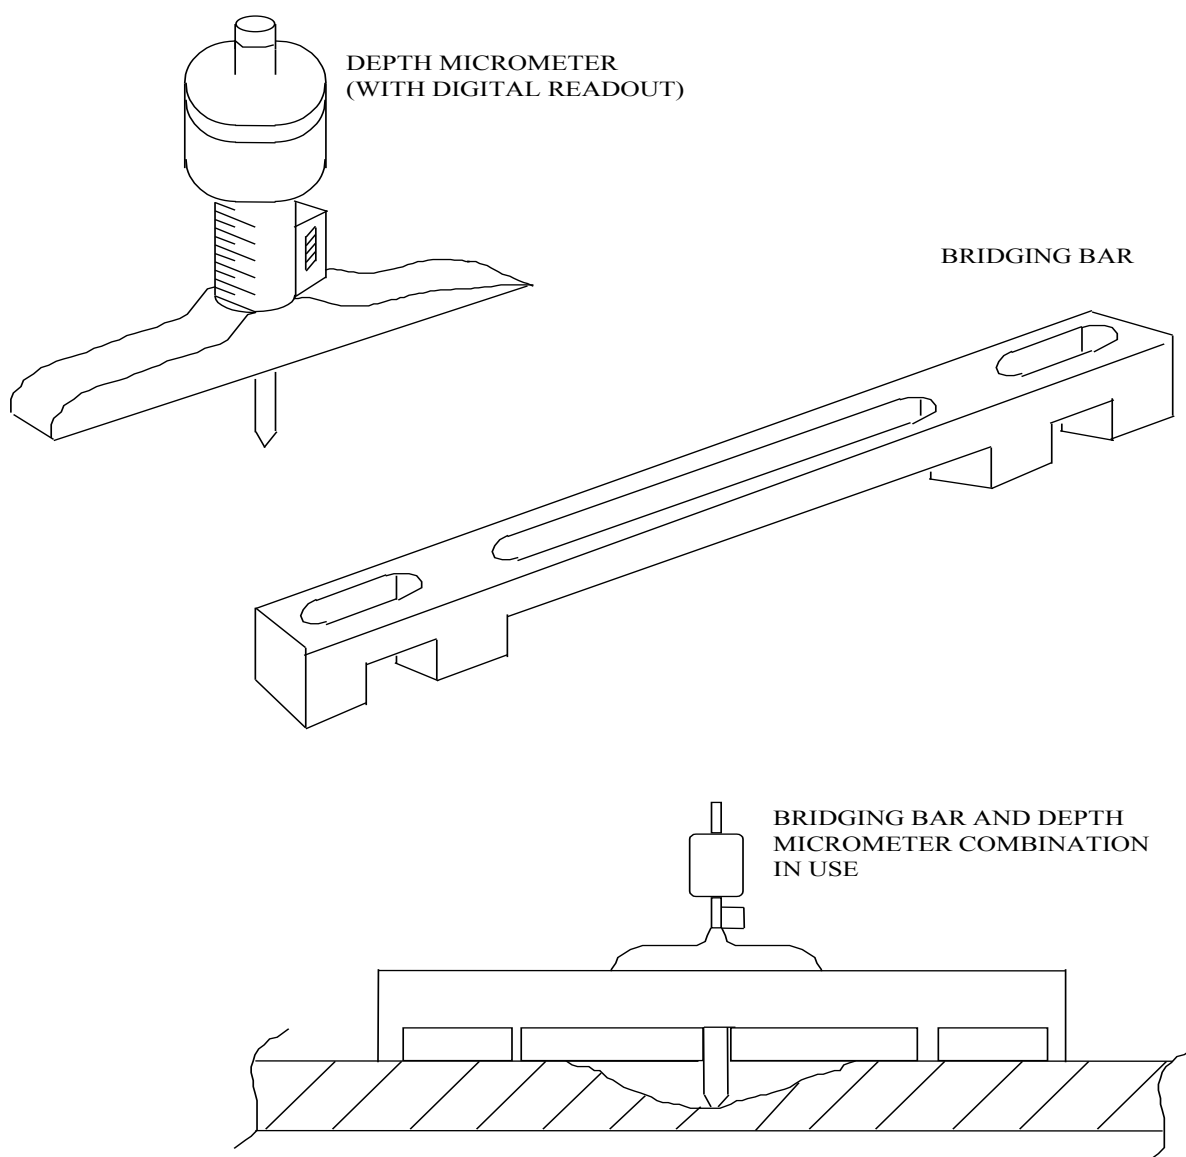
Typical Micrometer and Bridging Bar Arrangement
